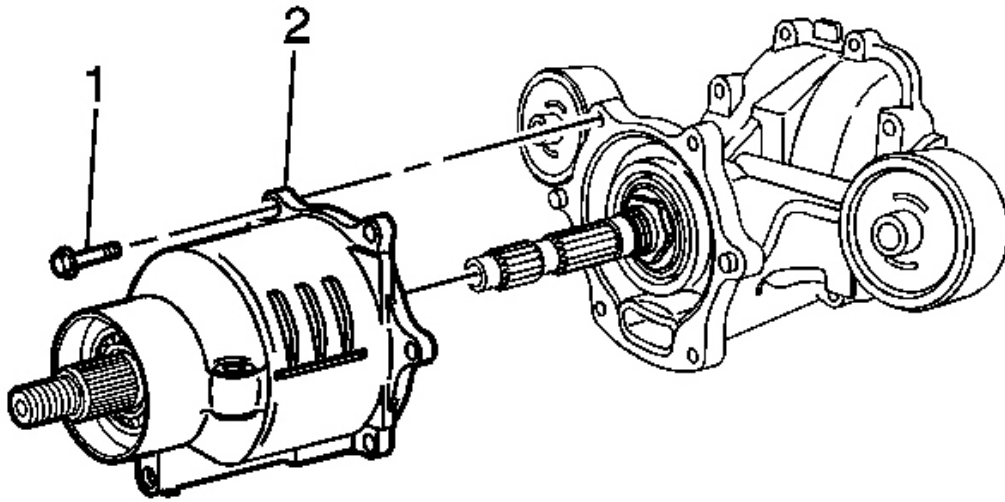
Removing Bolts & The Clutch Cover From The Differential Housing
